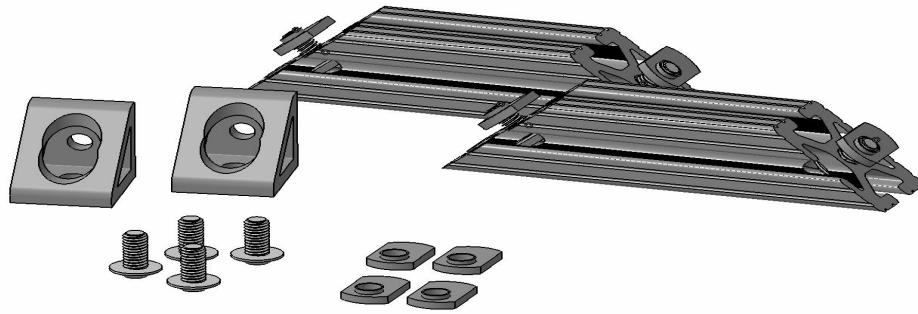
Beams, gusset brackets, screws, and T-nuts for the next assembly
